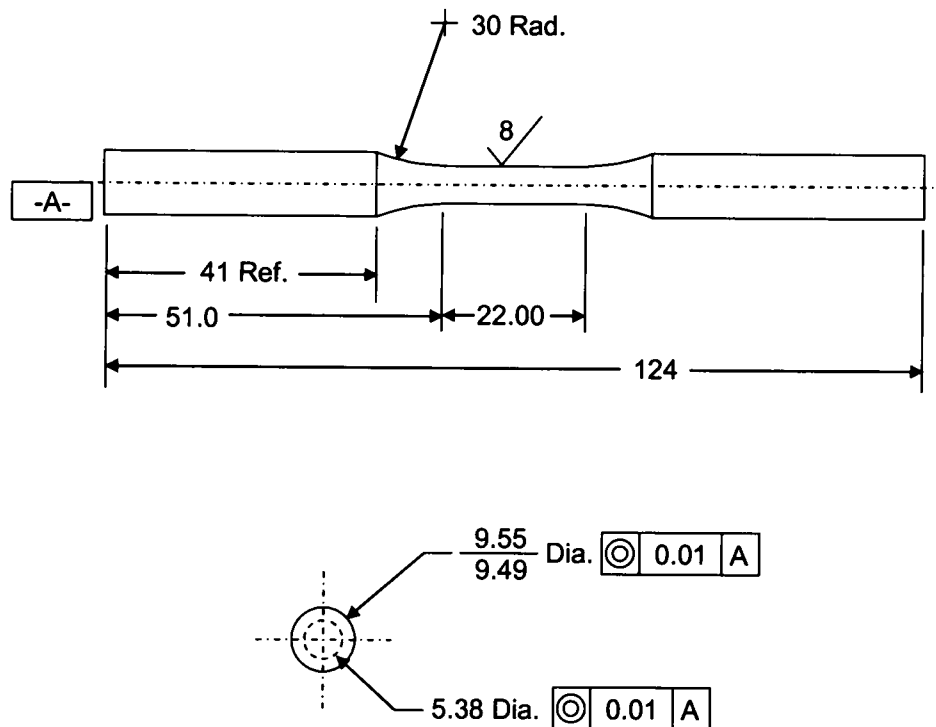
Drawing of Cylindrical Dogbone Specimen Geometry.
